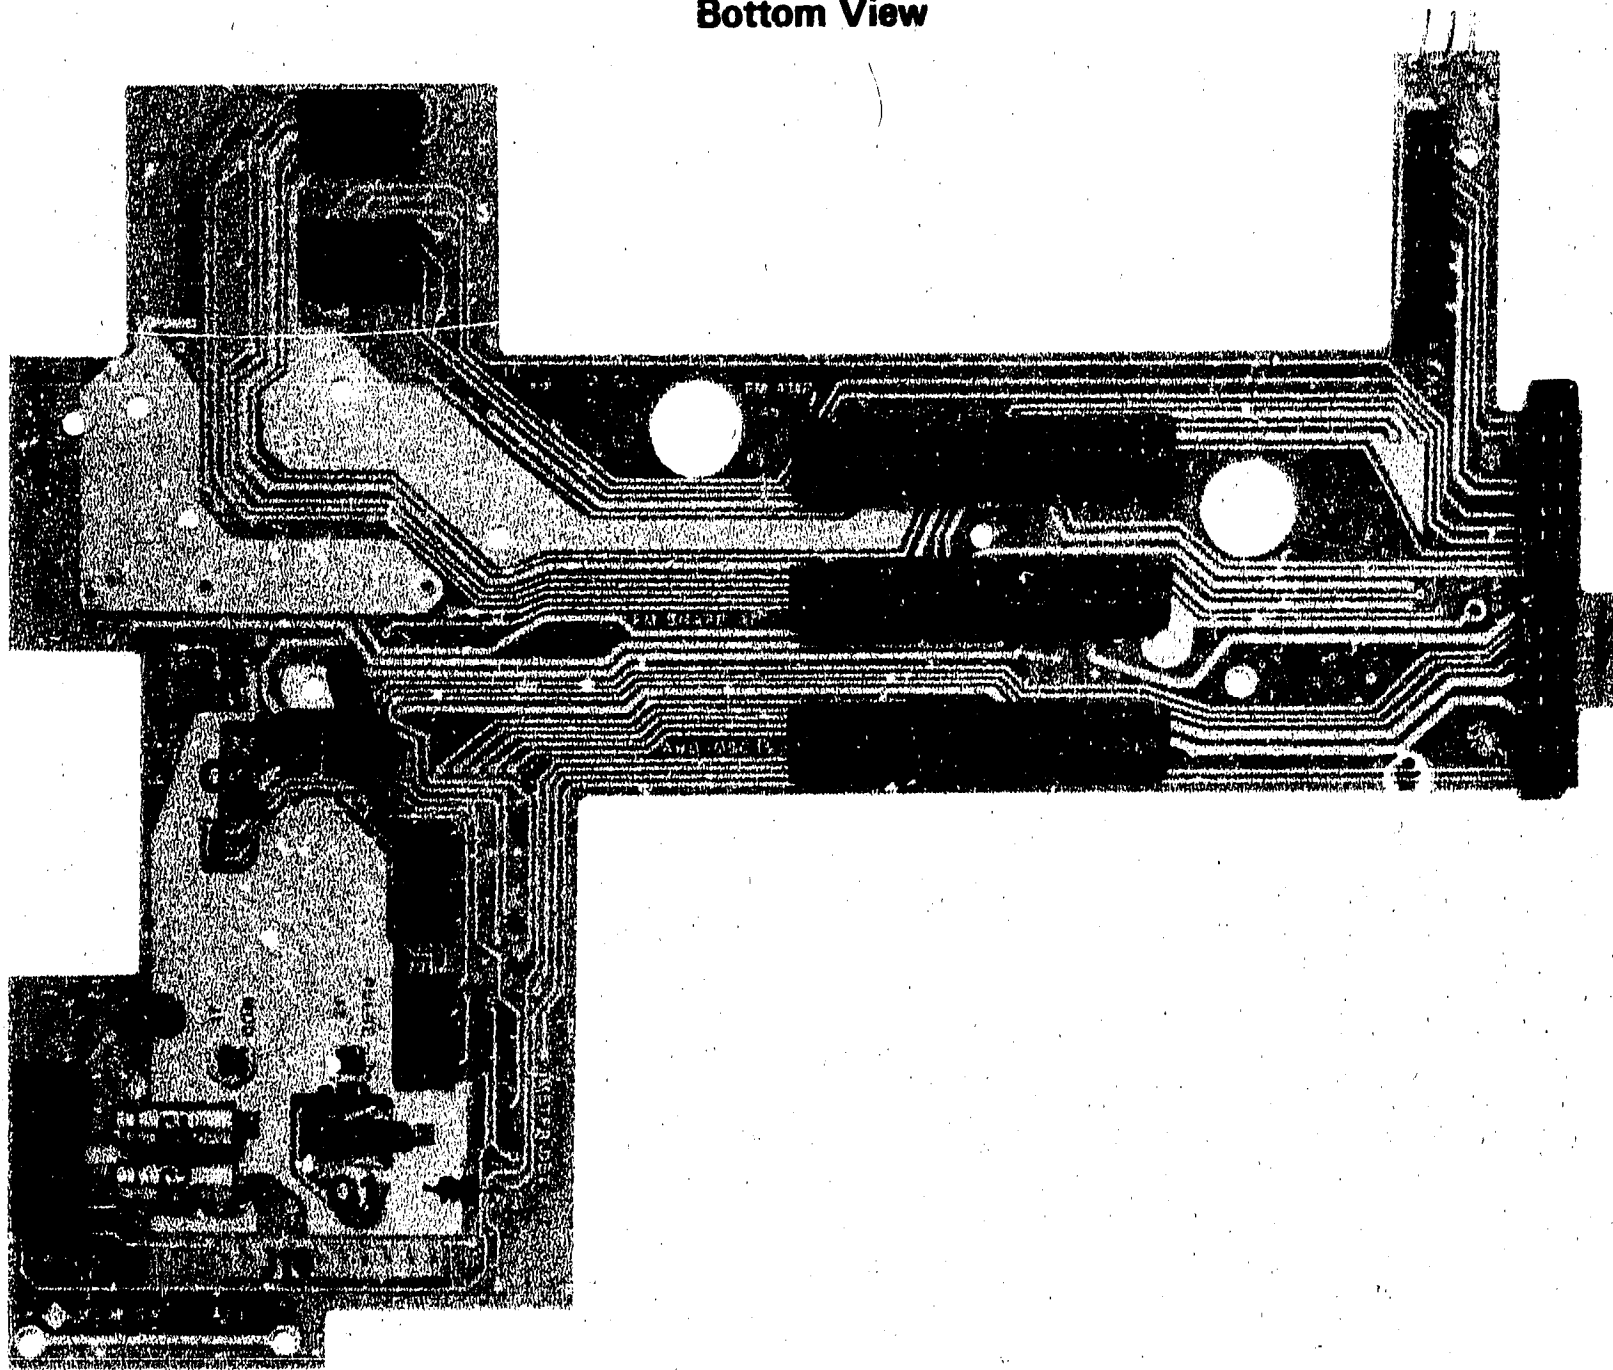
A13 Modulation/Metering Mother Board Assembly Component Locations (Bottom View)
